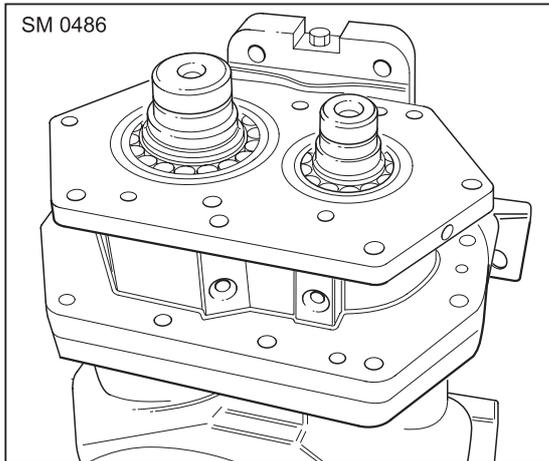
Fitting Bearing Inner Ring Halves
